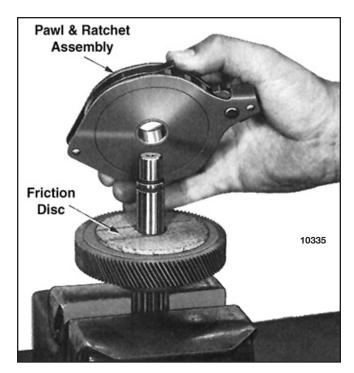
Removing Pawl and Ratchet Assembly from Load Brake Shaft
